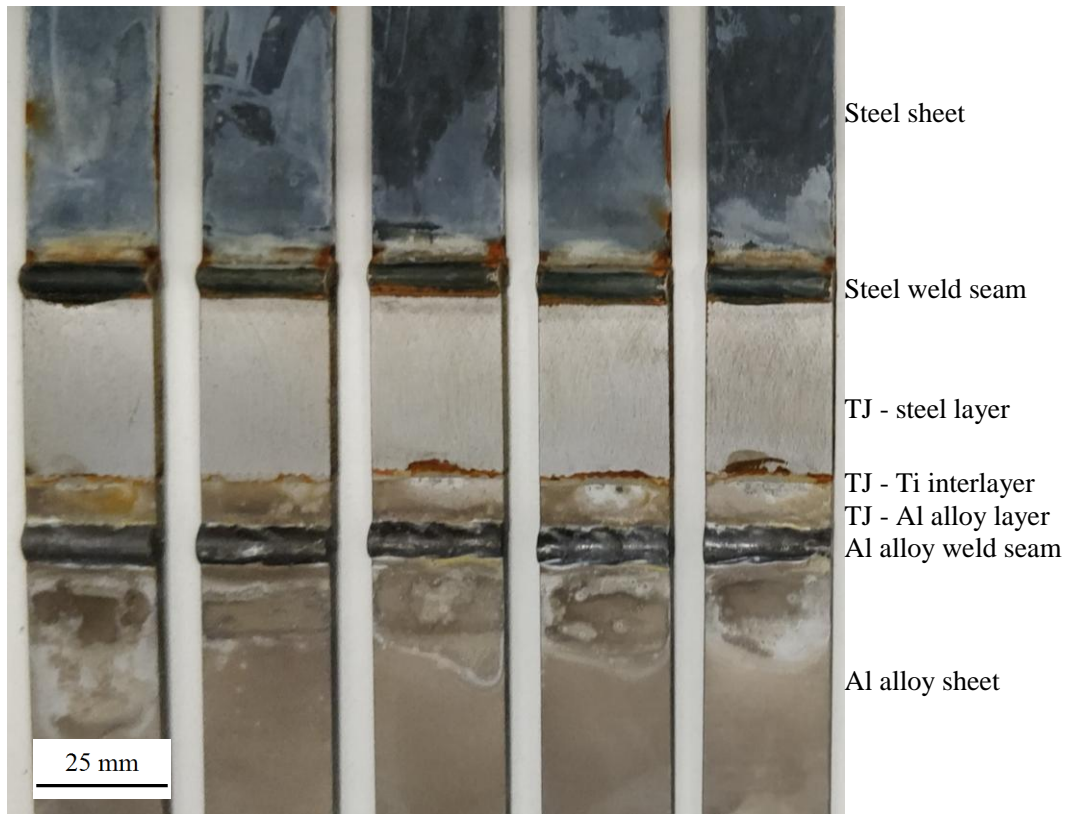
Type C hybrid joint specimens, after welding and corrosion. The specimens width is 25 mm.
